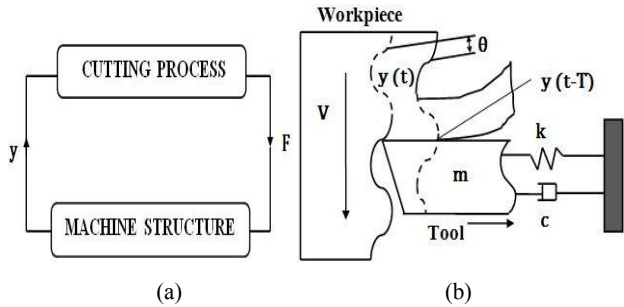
(a) Machine tool, cutting process interaction (b) Mechanism of regenerative chatter
